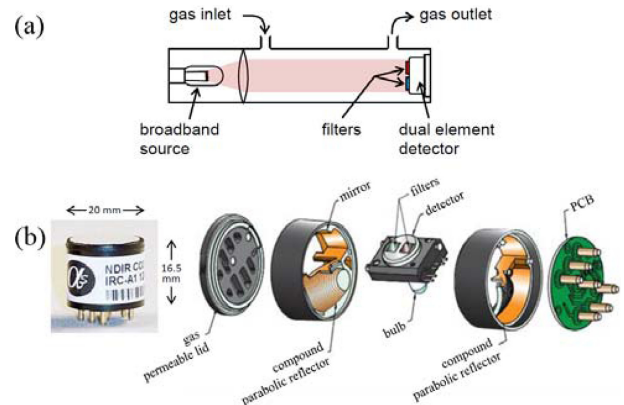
(a) Schematic diagram of a linear non-dispersive gas sensor (b) Photograph and exploded diagram of a manufactured NDIR sensor device[8].
